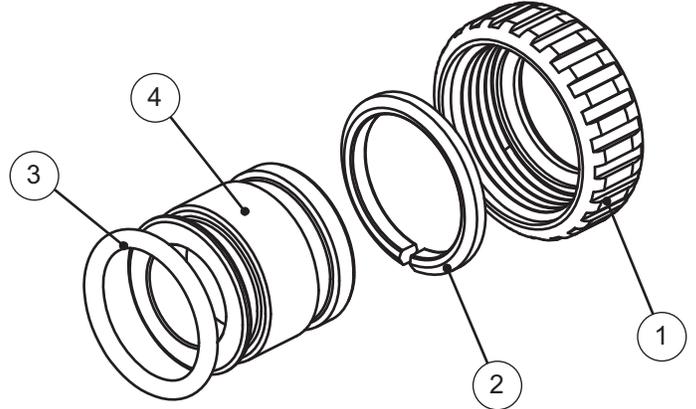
3/4" Brass Sweat Assembly - CV3007-03
